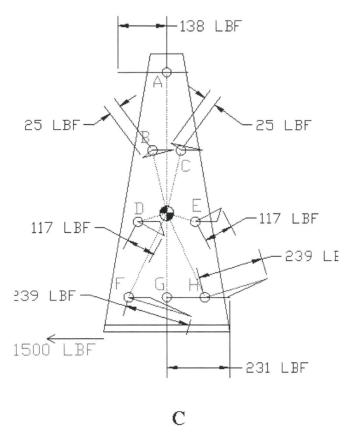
Roof Fitting Bracket - Reactions
